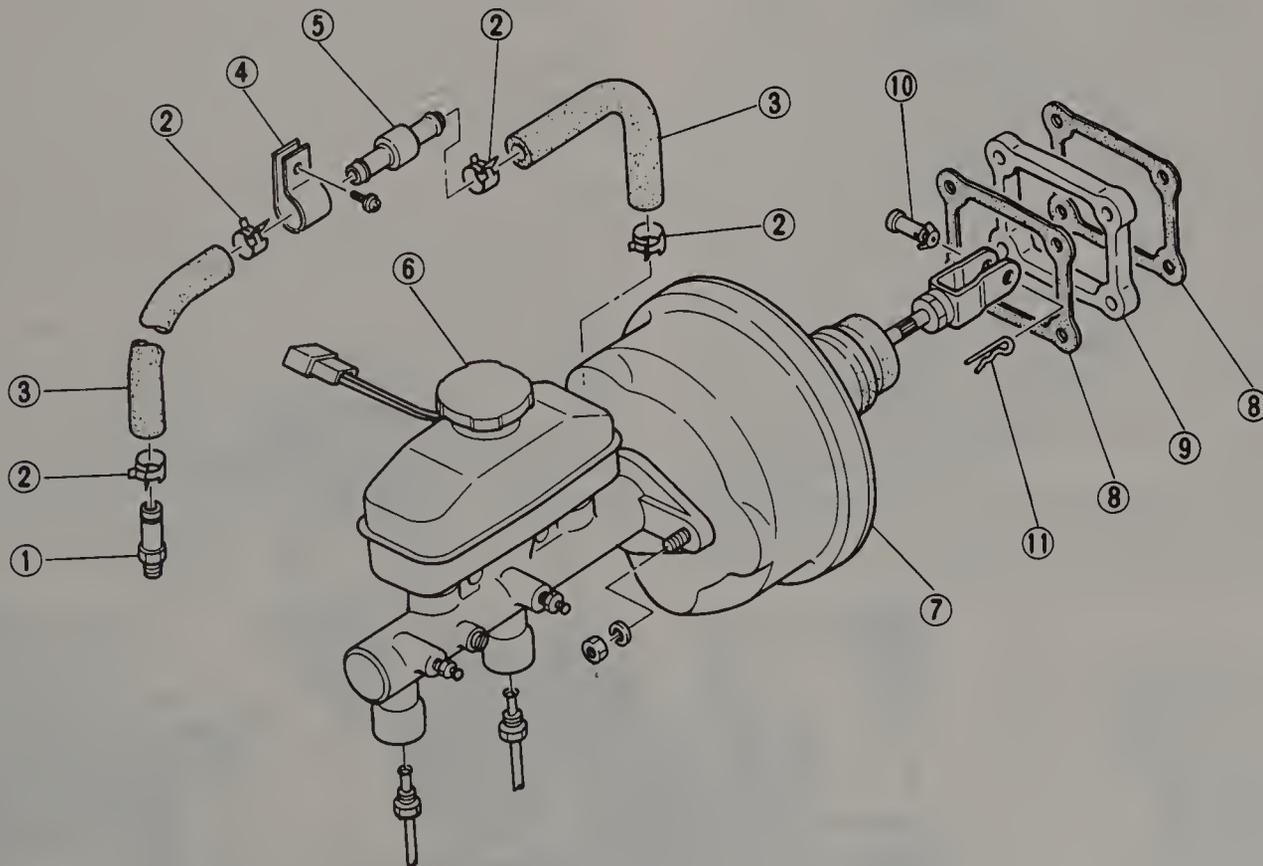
Brake booster components – exploded view (Sec 18)
